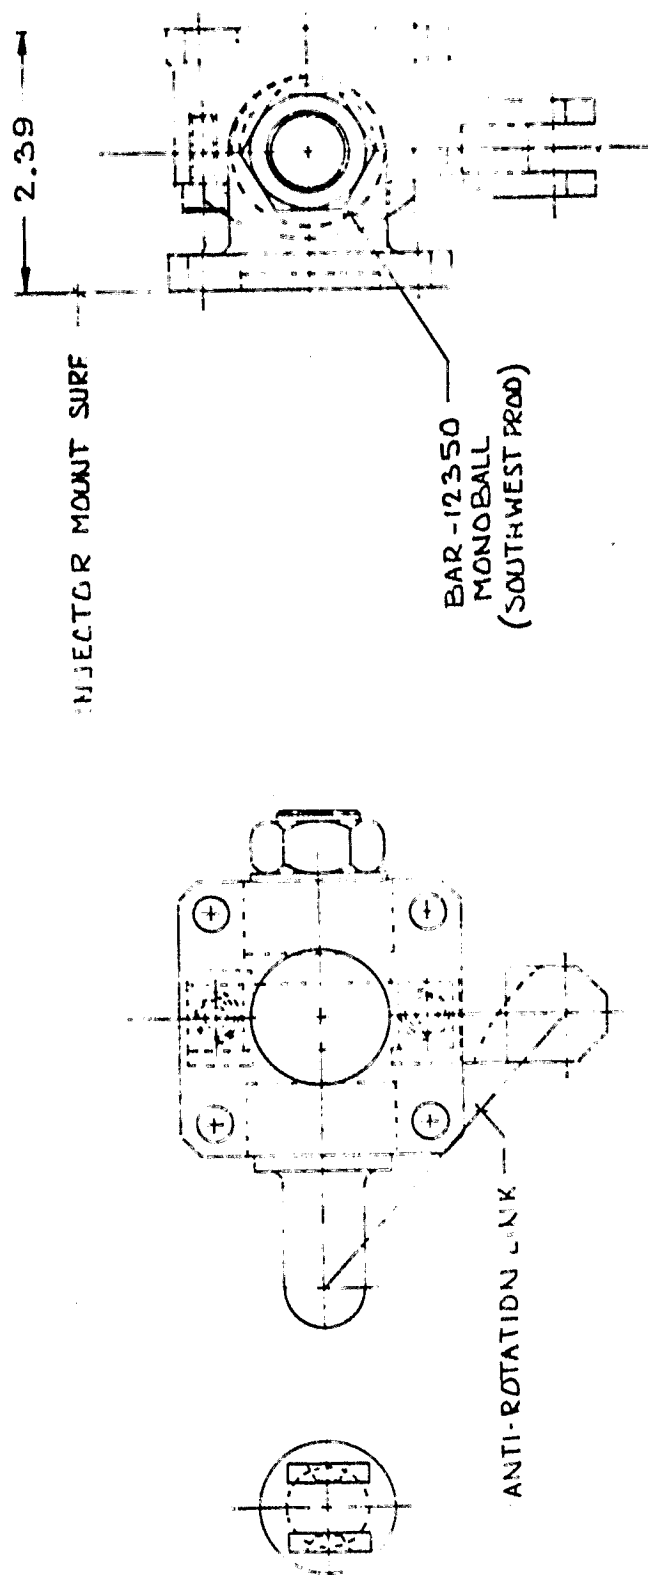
Gimbal Assembly (ALRC Drawing No. 1191993)
